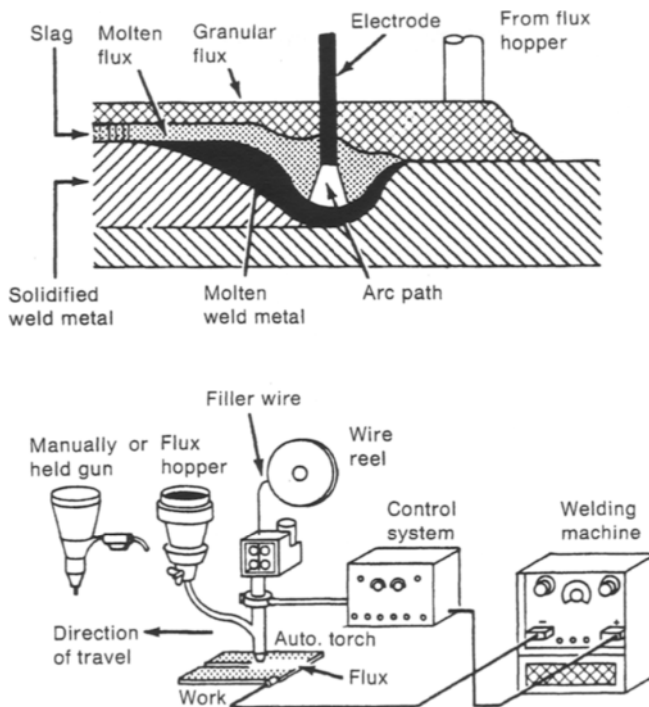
Diagram and equipment arrangement for submerged arc welding. (Reproduced with permission of Nickel Development Institute publication 9002; *Welding of Stainless Steel and Other Joining Methods*.)
